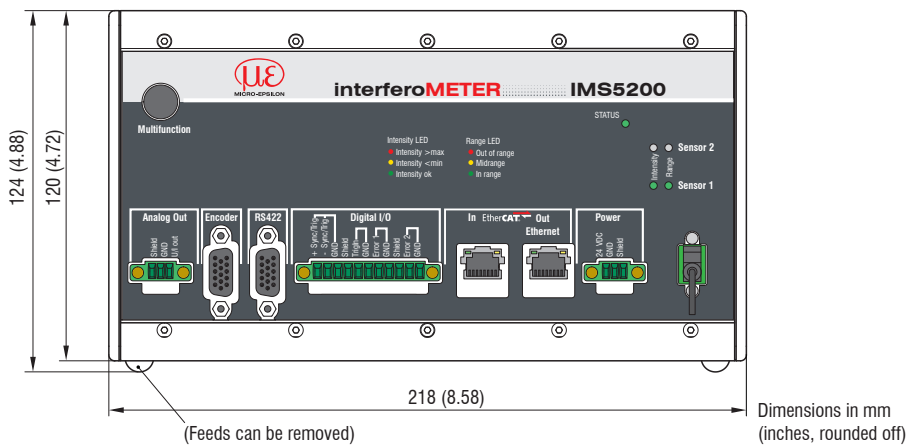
Dimensional drawing front view of the IMC5200 controller
